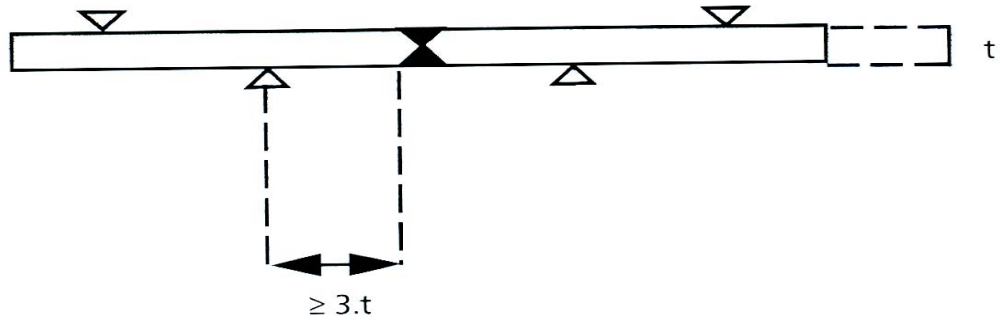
Geometrical characteristics of welded specimens loaded in tension or bending
